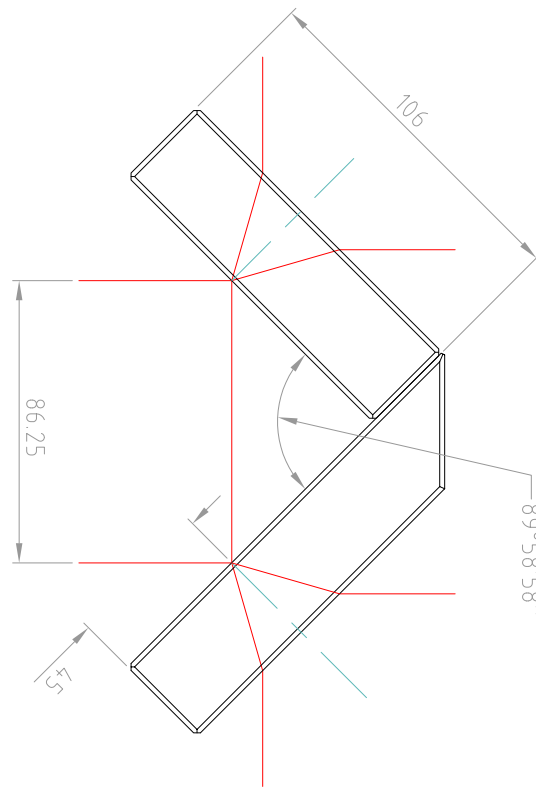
IMC flat mirrors assembly; top view with laser beam axis.
